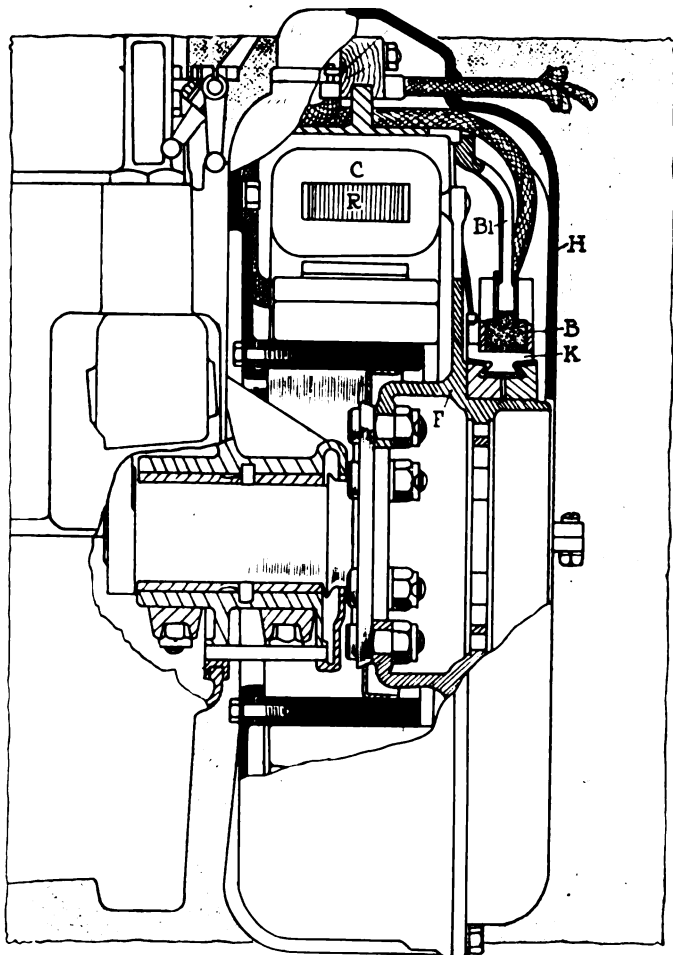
Sectional view of electrical self-starter attached to rear end of crankshaft
